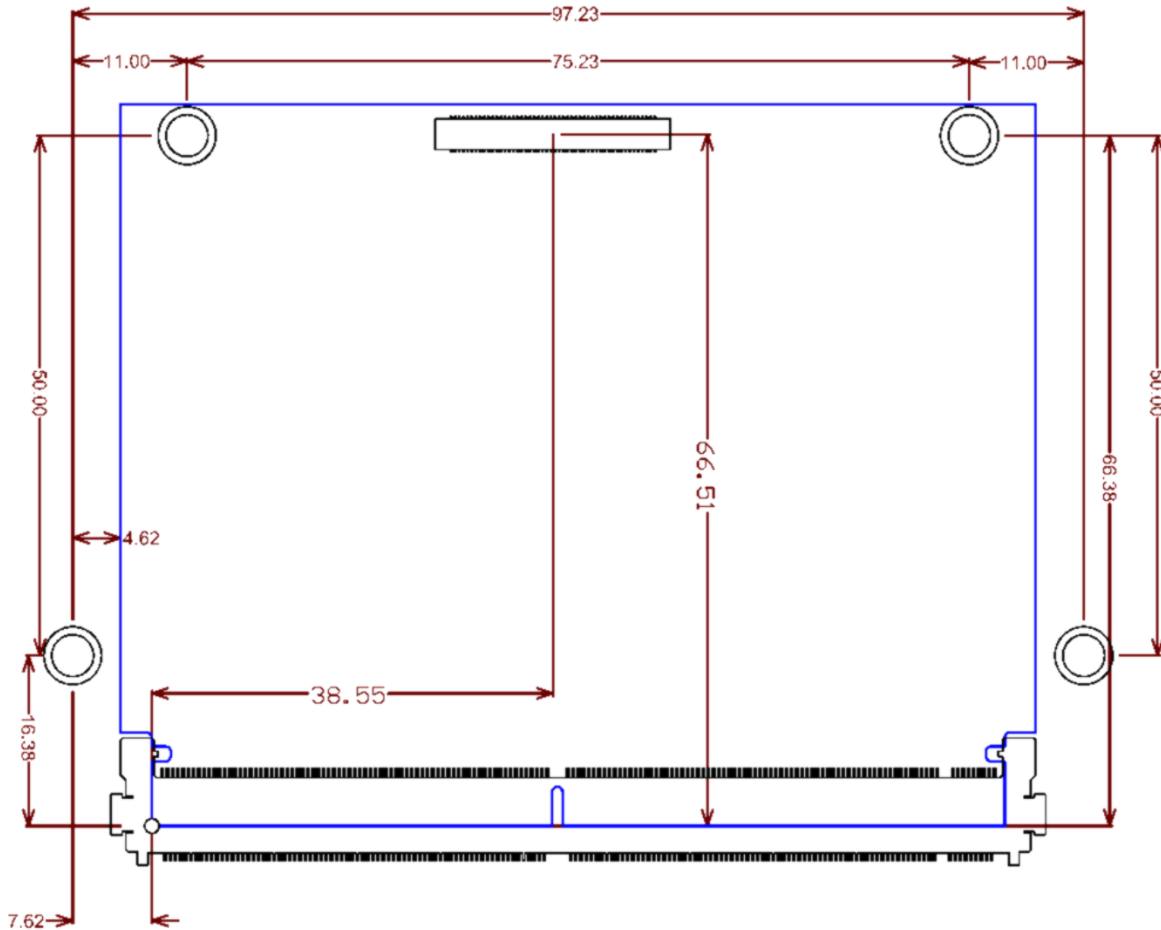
Recommended MitySOM-AM57 Carrier Card Outline with heat spreader mounting holes
